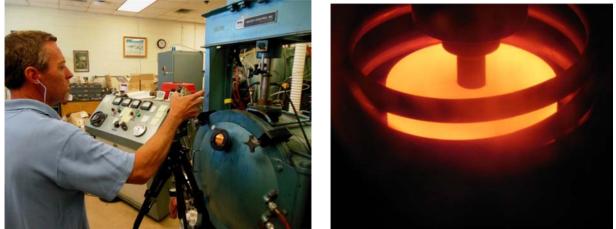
(Left) Picture of the Hot Press and Motor Generator and (Right) Heating of Die Assembly During a Hot Press run.
